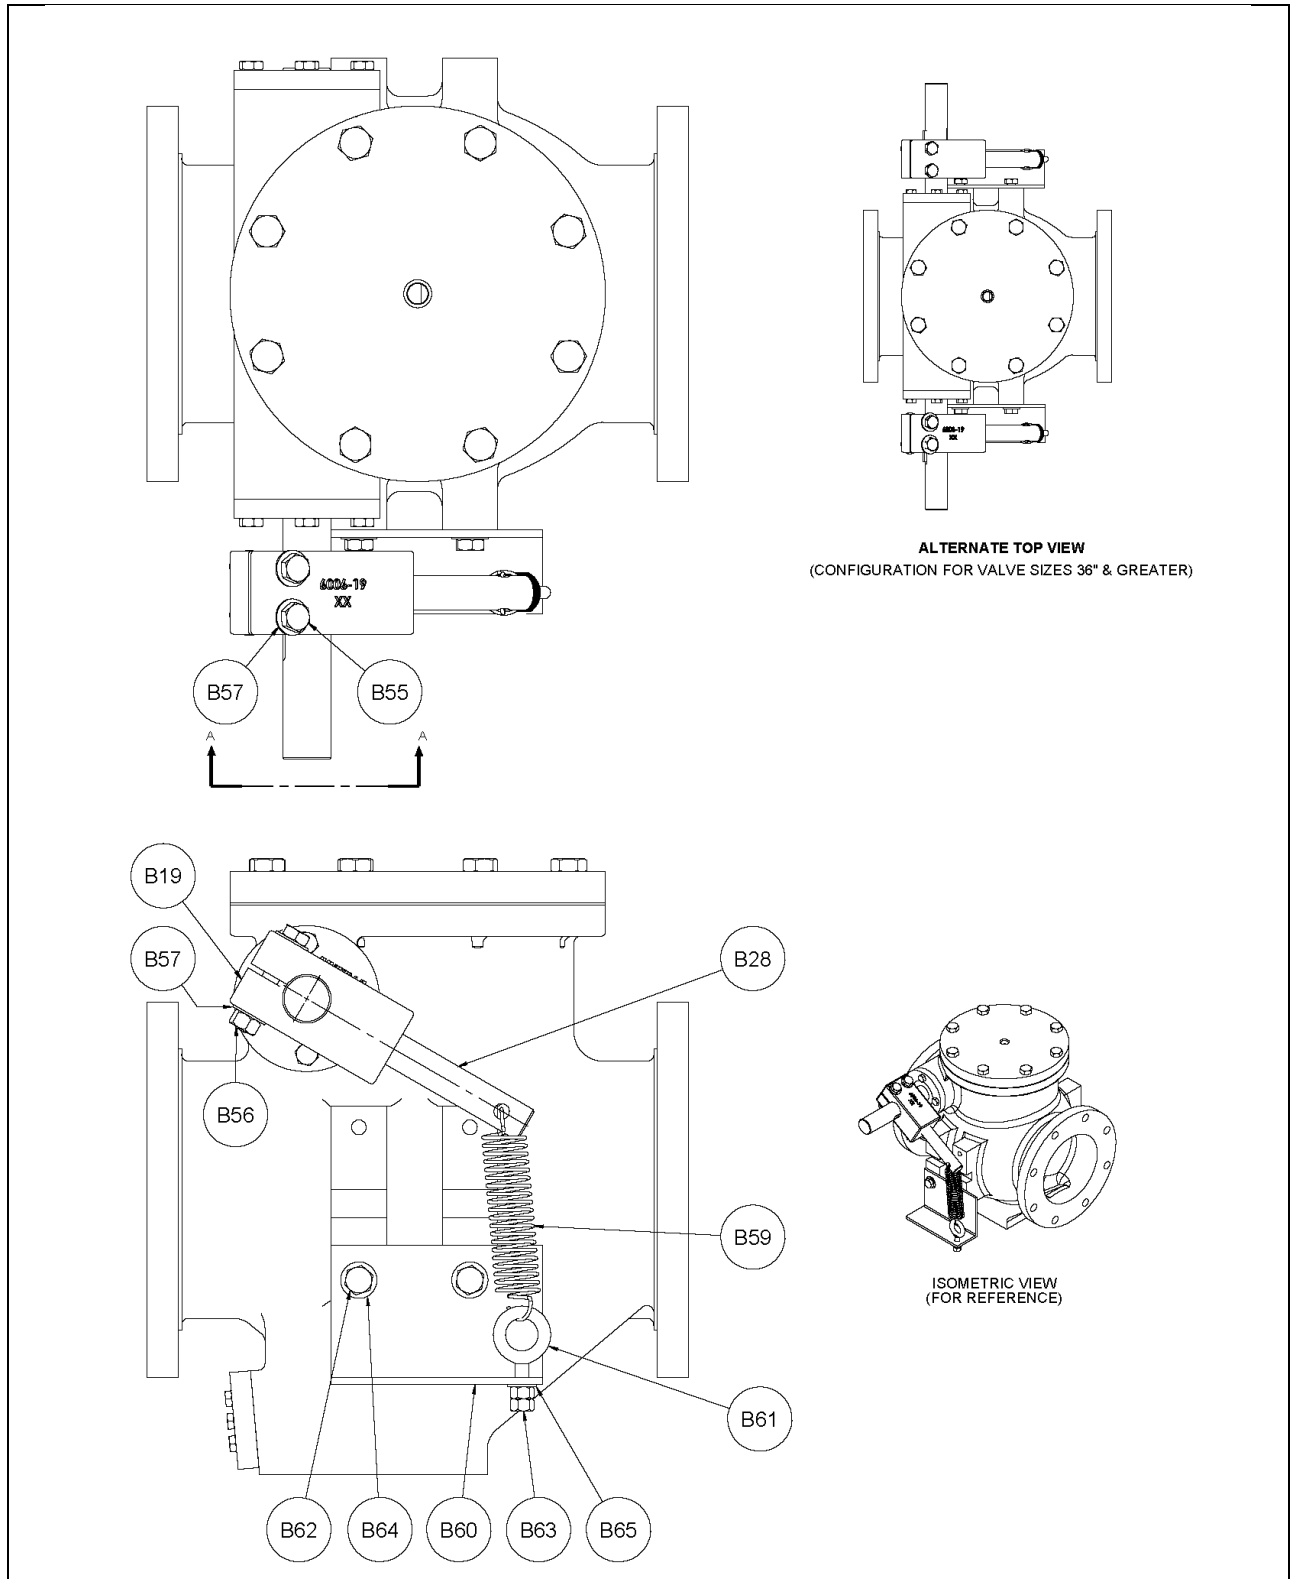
CVS-6000/6000A-LS and -CLS Swing Check Valve with Lever and Spring
